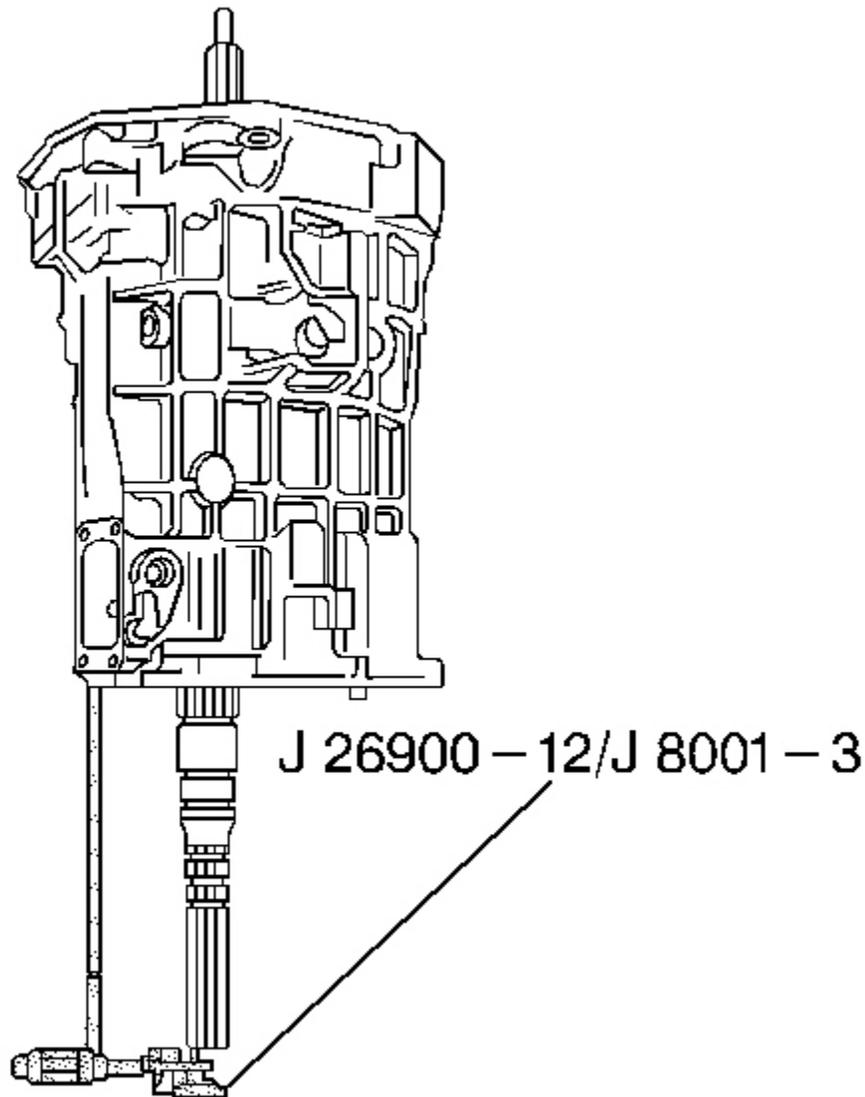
Measuring Input Shaft/Mainshaft End Play Using J 8001-3
